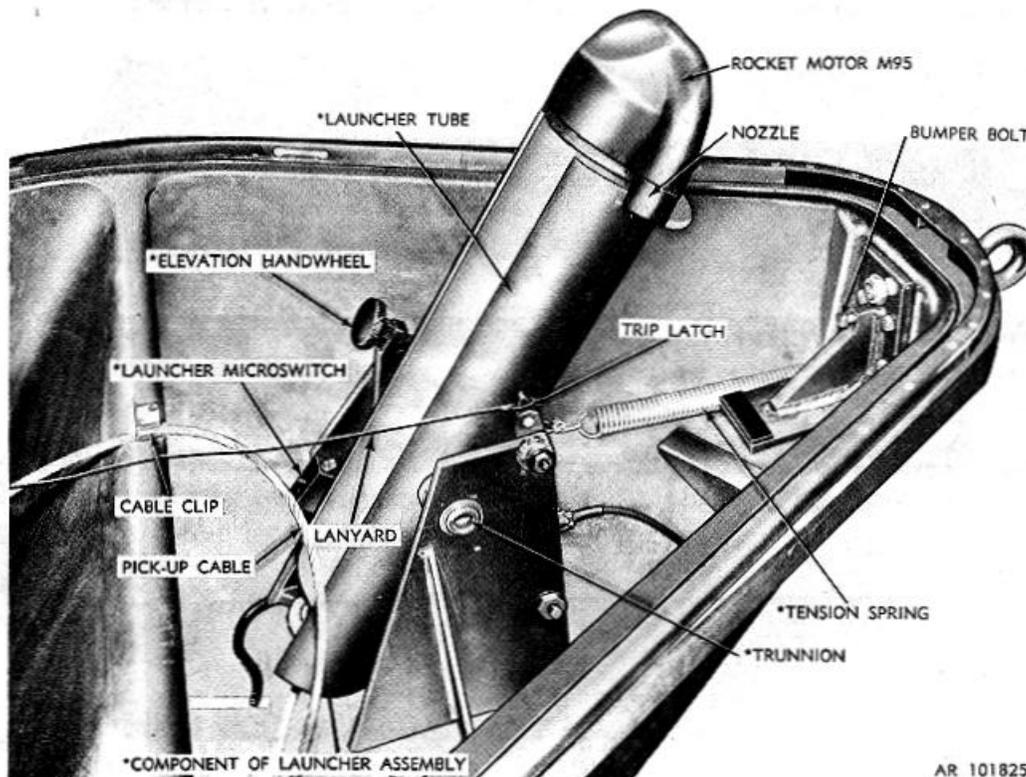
Launcher assembly and rocket motor M95 in elevated position.
